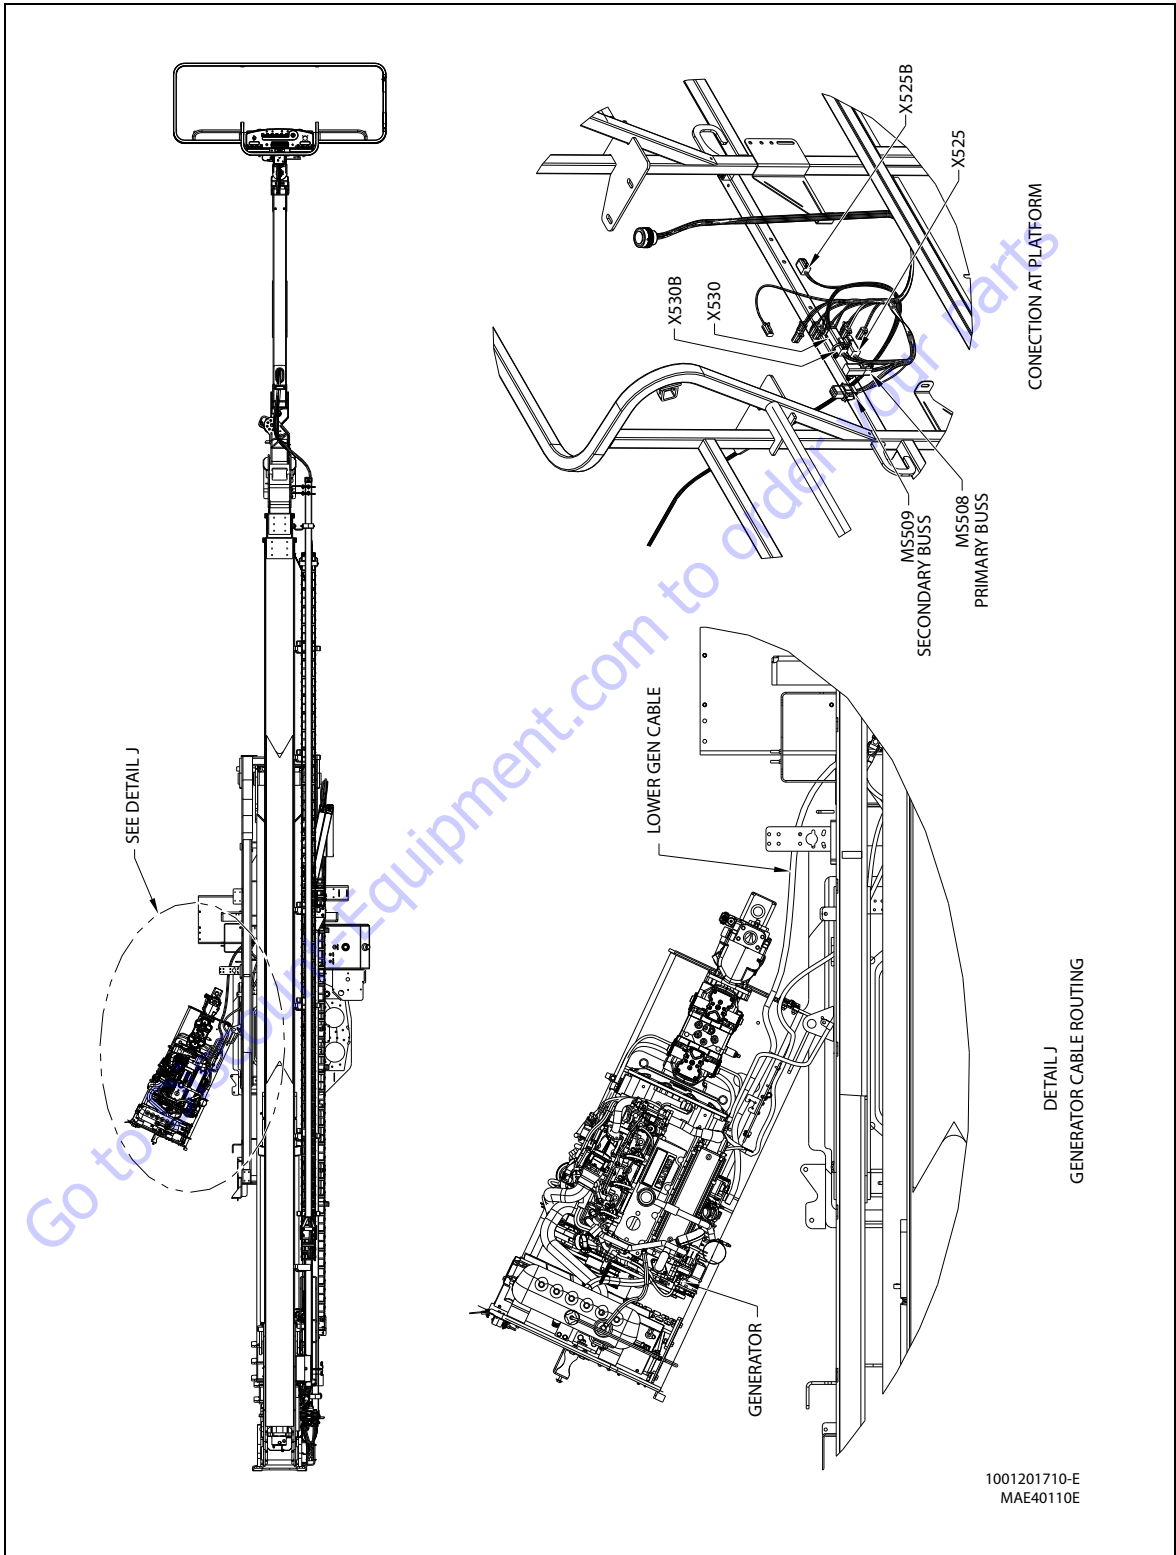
Boom Electrical Installation (4000W Generator) - Sheet 4 of 5
